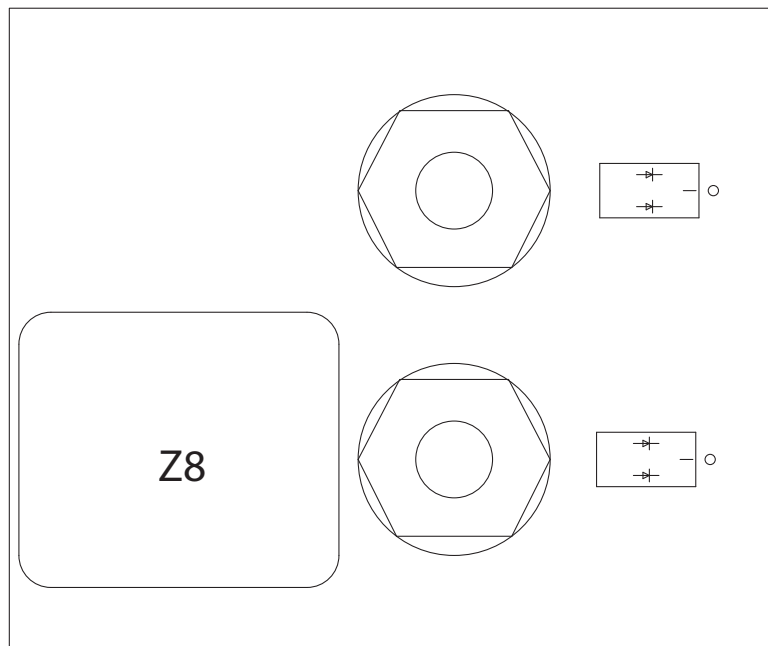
BZFP Bluetooth Front Panel Module (top) Rev 0
